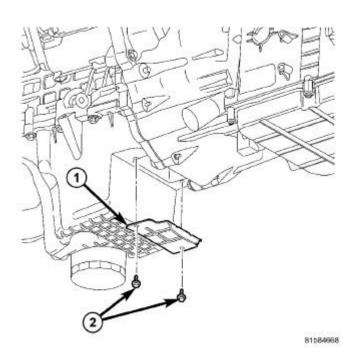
Flex Plate Inspection Cover & Fasteners Courtesy of CHRYSLER LLC
